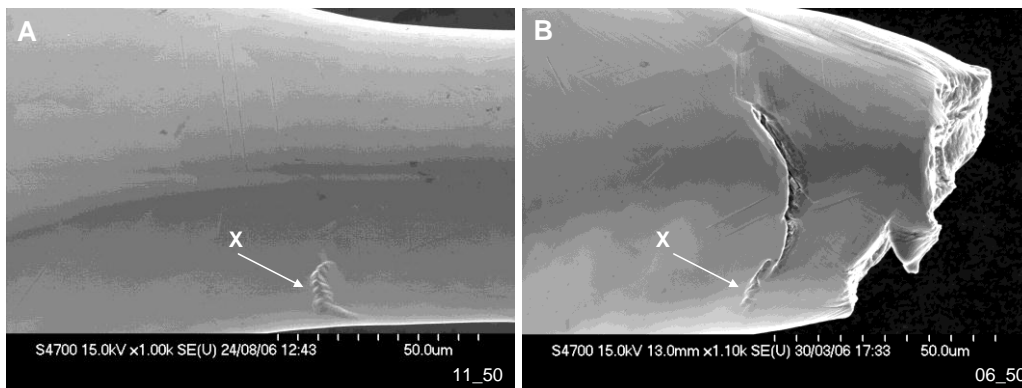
A feature (marked X on A) on a 50 μ m runout specimen which is similar to a large crack identified on a failed 50 μ m specimen (marked X on B).
